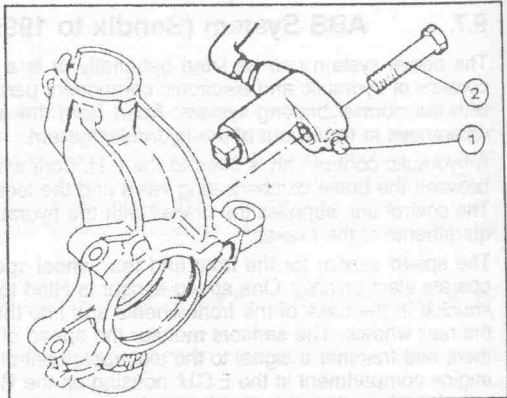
Adjusting a front wheel speed sensor (refer to text).
